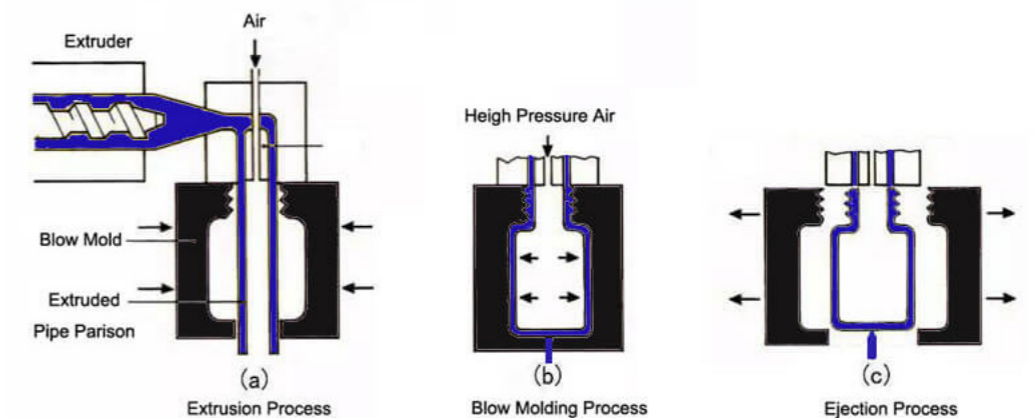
Extrusion blow molding advice (Alleych, n.d.)
